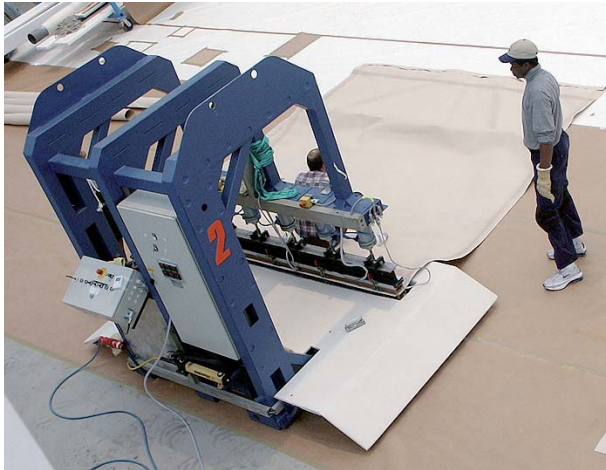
PTFE heat welding press with a heating beam length of 2 m and a maximum pressure of 7 bar
